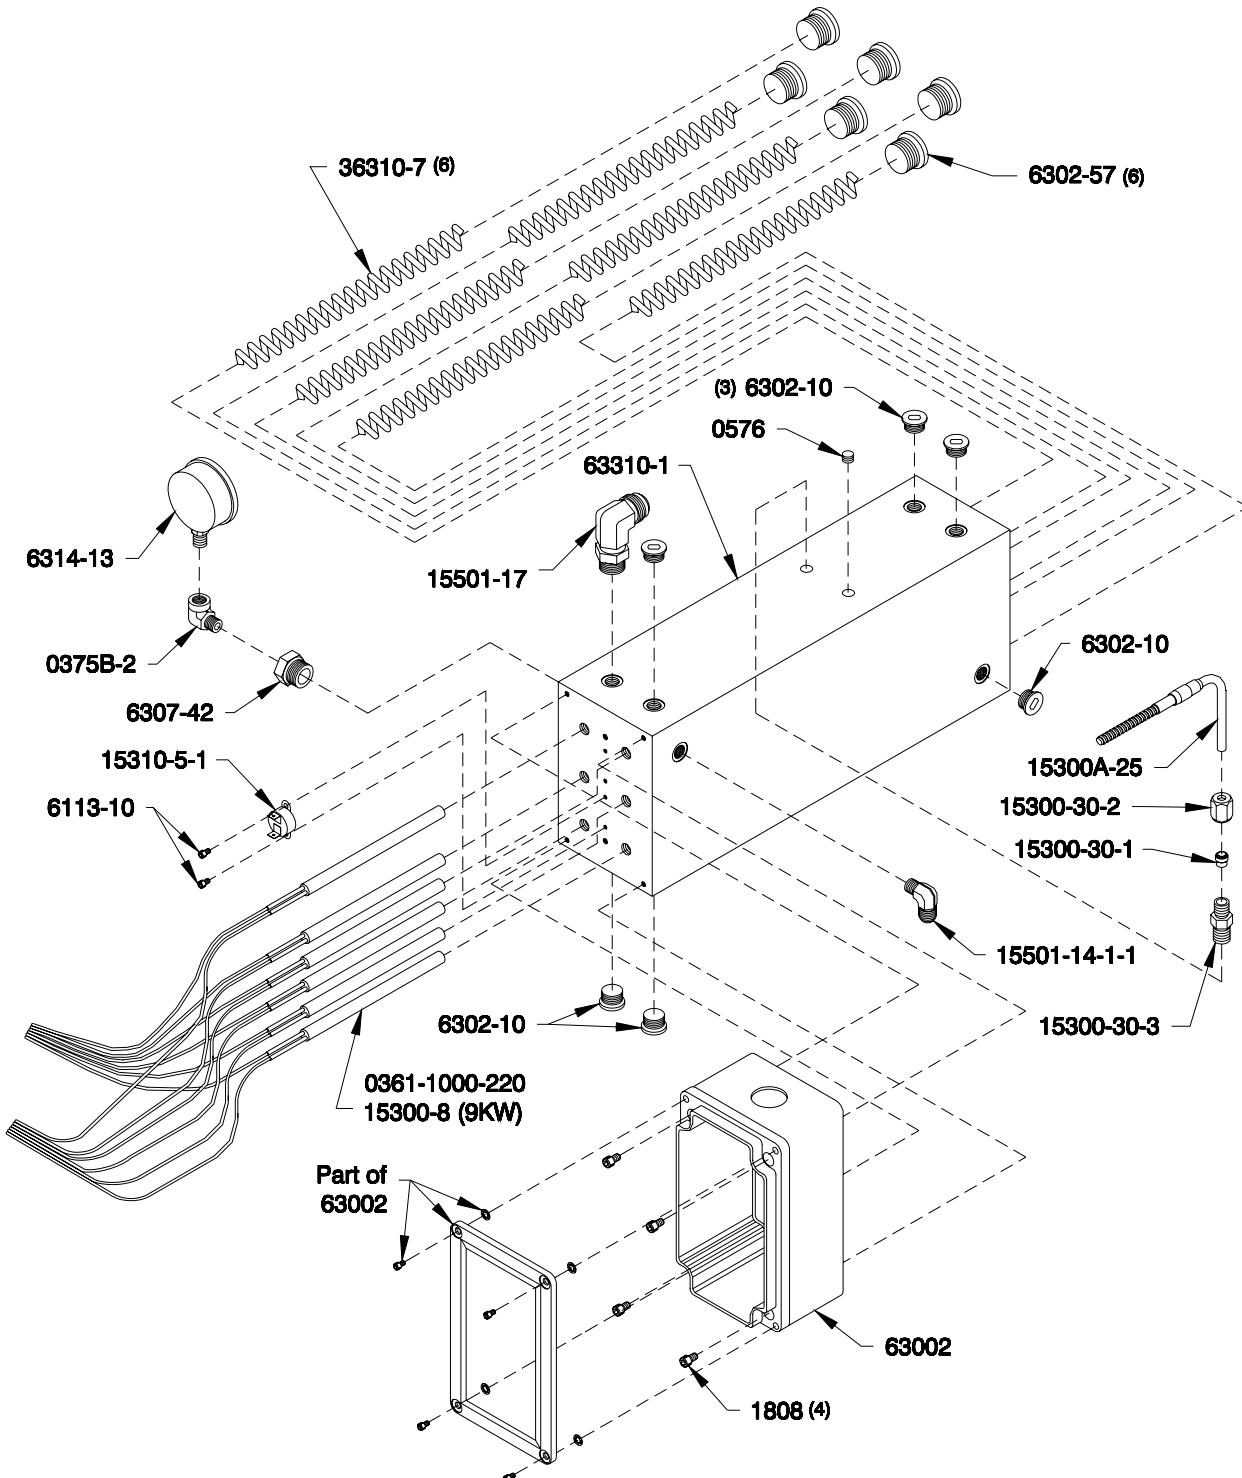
R-Primary Heater Assembly (Part No. 63310-240 and 63310-240-9KW), Exploded View
